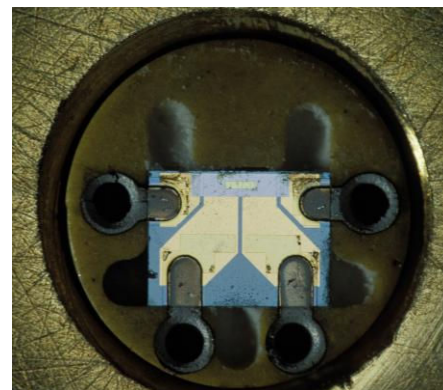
Sputtered aluminium bridges between each of four on-chip bonding pads and the chamfers of drilled holes in the ceramic.
